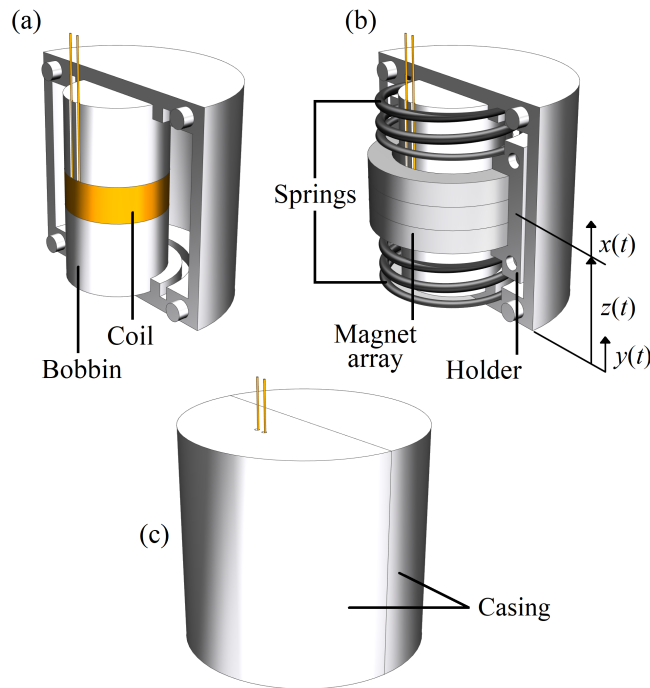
Schematics of the prototype. (a) Connection of the coil-bobbin to one half of the casing. (b) Incorporation of the holder, magnets, and springs. (c) External view of the complete assembly.
